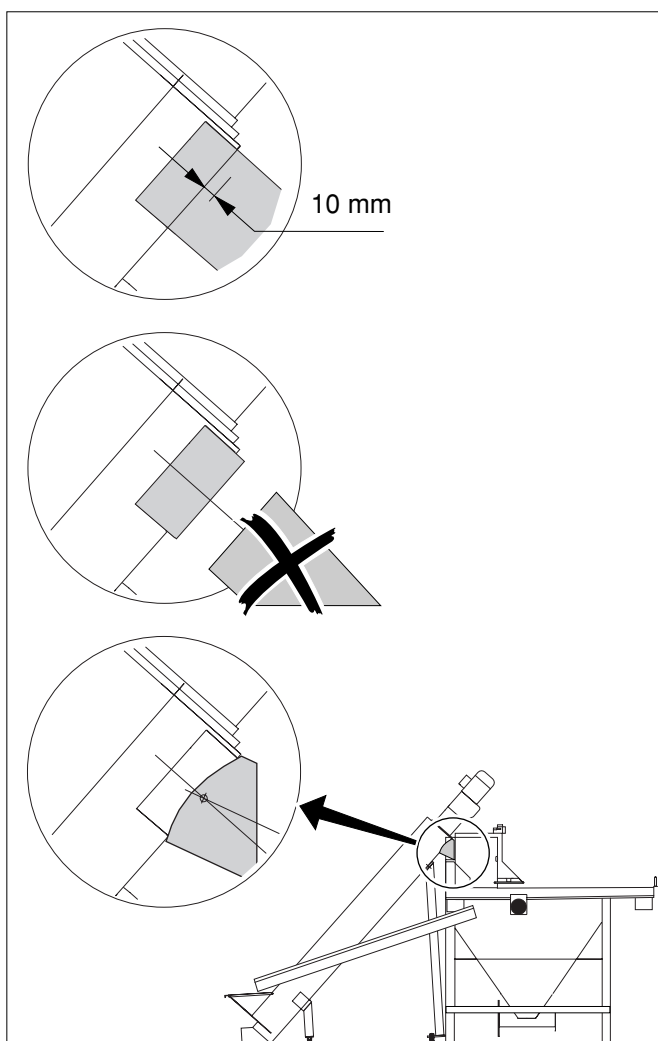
Set-up with detail outfeed washer/conveyor screw
